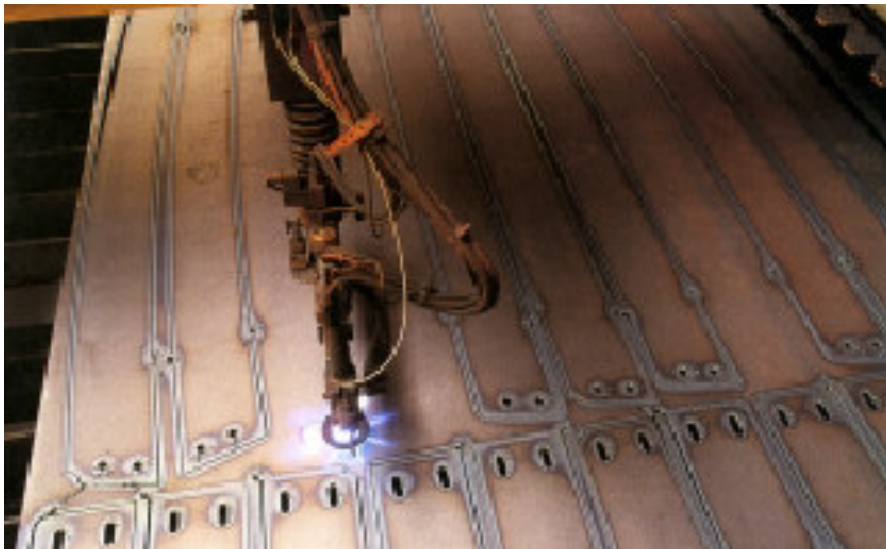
CNC cutting of steel supports for masonry walls in Zollhof Towers
